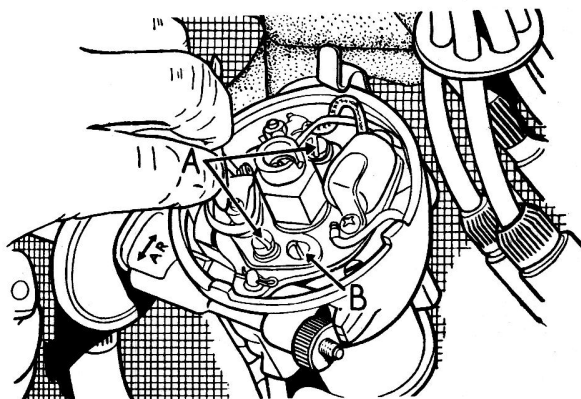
CHECKING CONTACT BREAKER GAP – DMBZ6A DISTRIBUTOR
